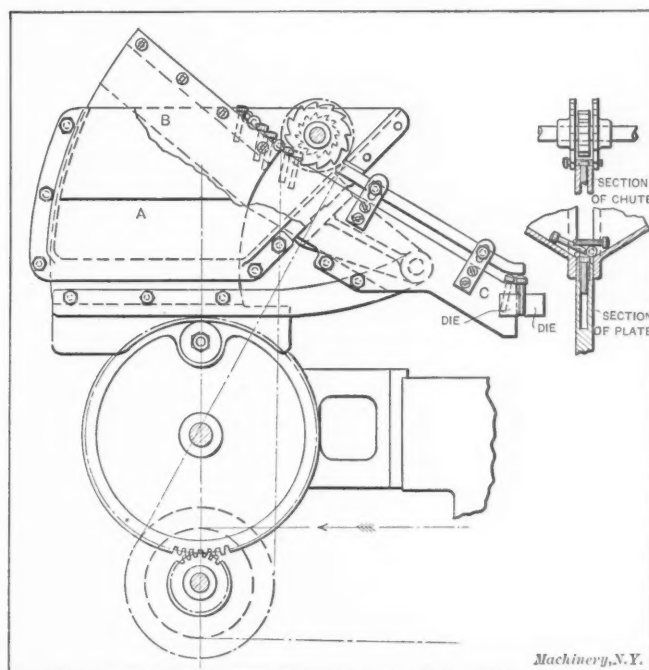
Automatic Feeding or Hopper Mechanism for Screw Blanks in Thread Rolling Machines
